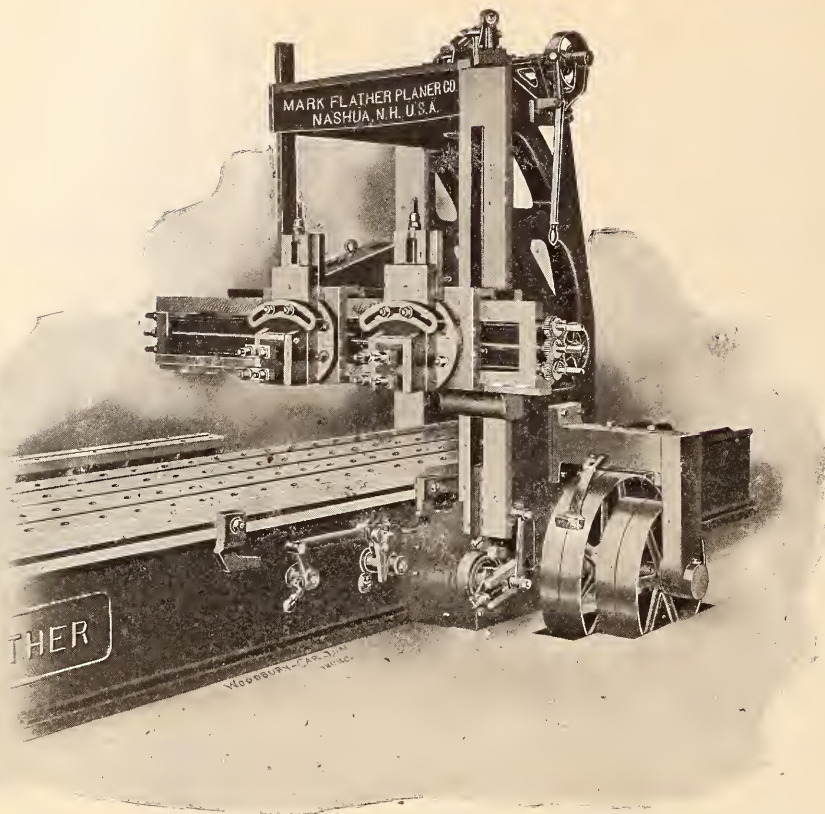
STANDARD PLANER WITH OPEN-SIDE ATTACHMENT—FRONT VIEW AS OPEN-SIDE PLANER—MANUFACTURED BY FLATHER PLANER CO., NASHUA, N. H.
